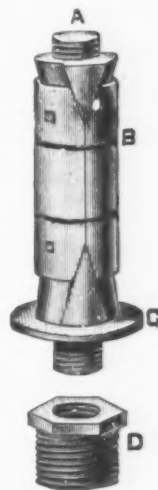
Expansion Bolt with Reducing Pipe Socket.
